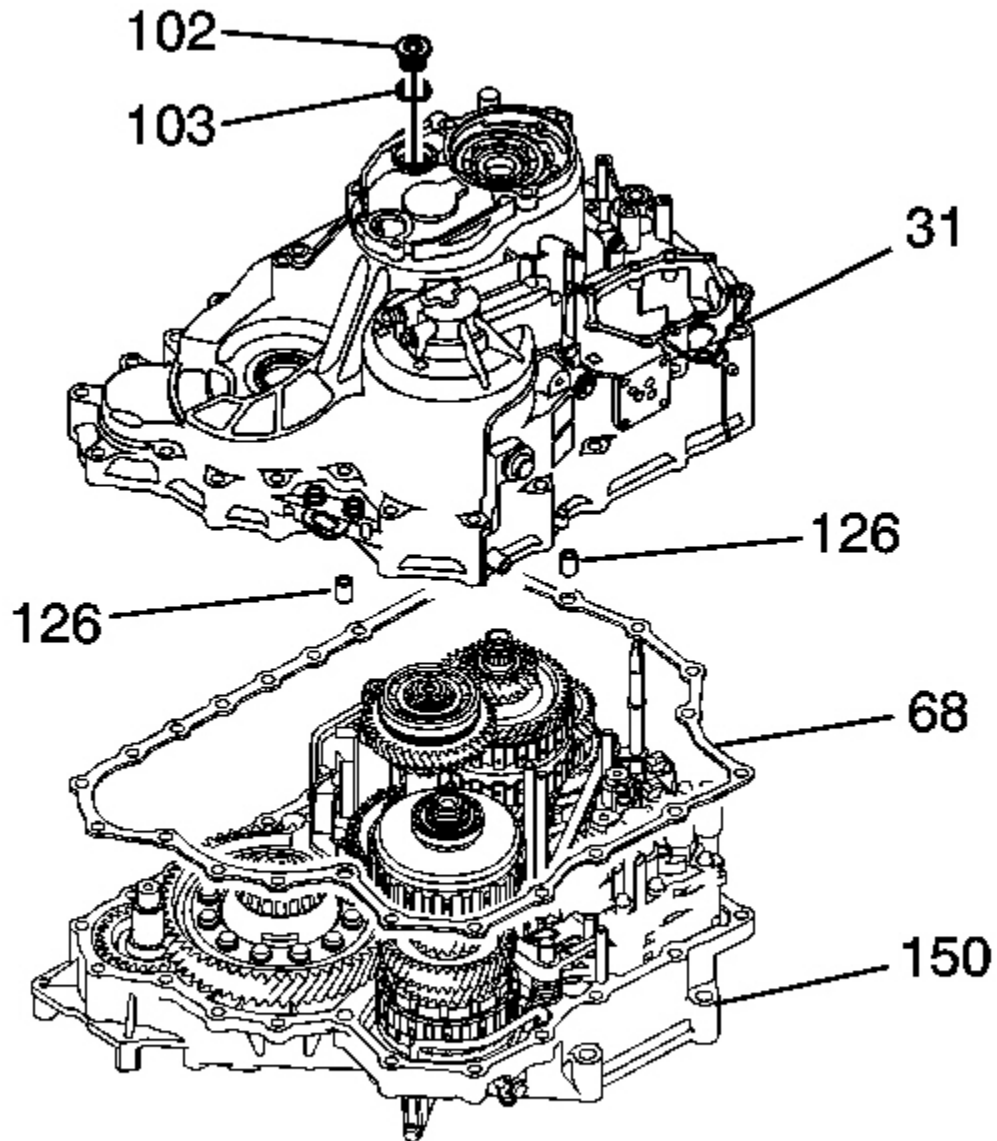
Transmission Case Housing, Housing Gasket & Locating Pin
